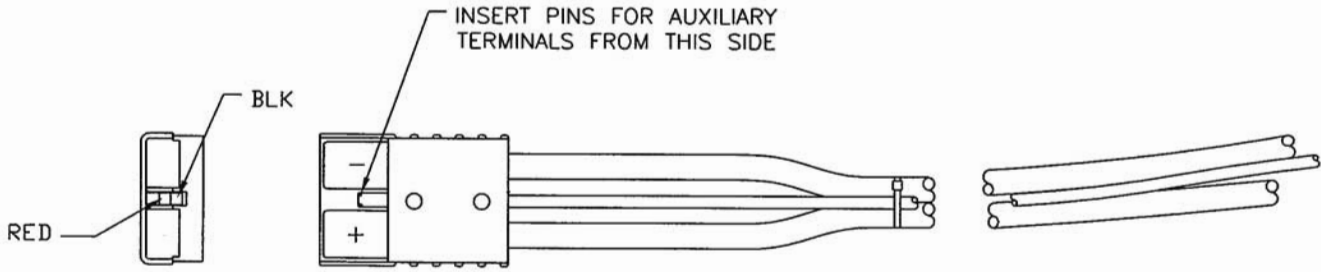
Battery Cable with SBX Auxiliary Contact Cable Harness
